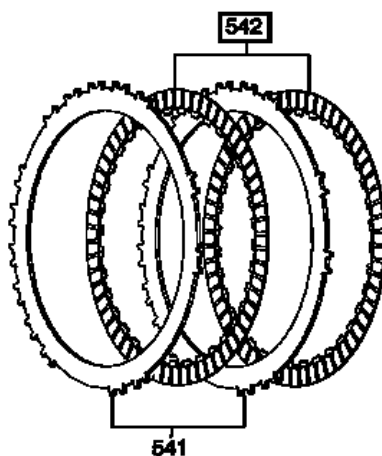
2-6 Plate Assembly (Gen 2) 24260698
